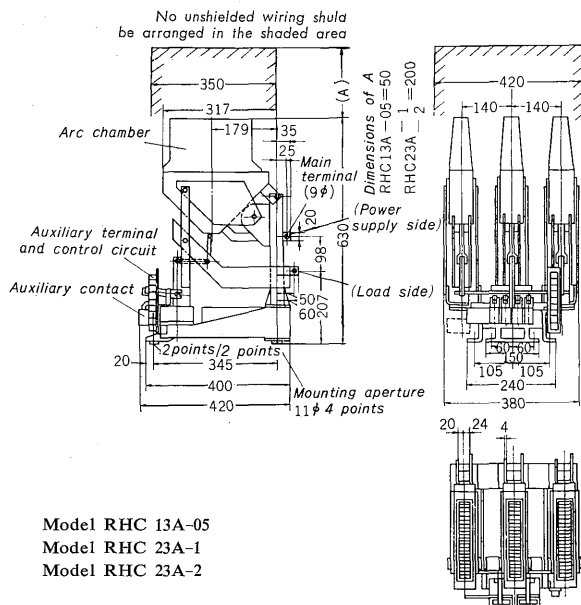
Outline dimensions of high-voltage ac air break contactors
